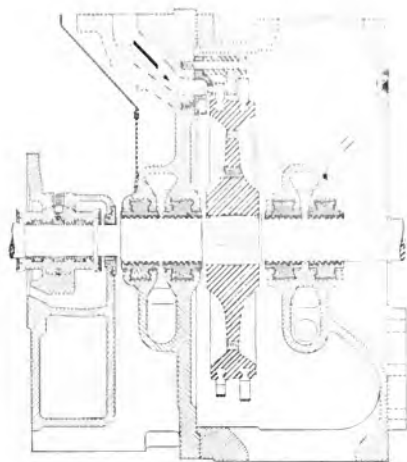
Assembly of 300-kw, 5037-r p.m., One-stage, Turbine for Connection Through Reduction Gears to 300-kw, 1000 r p.m., 120 240-volts Exciter Generator
